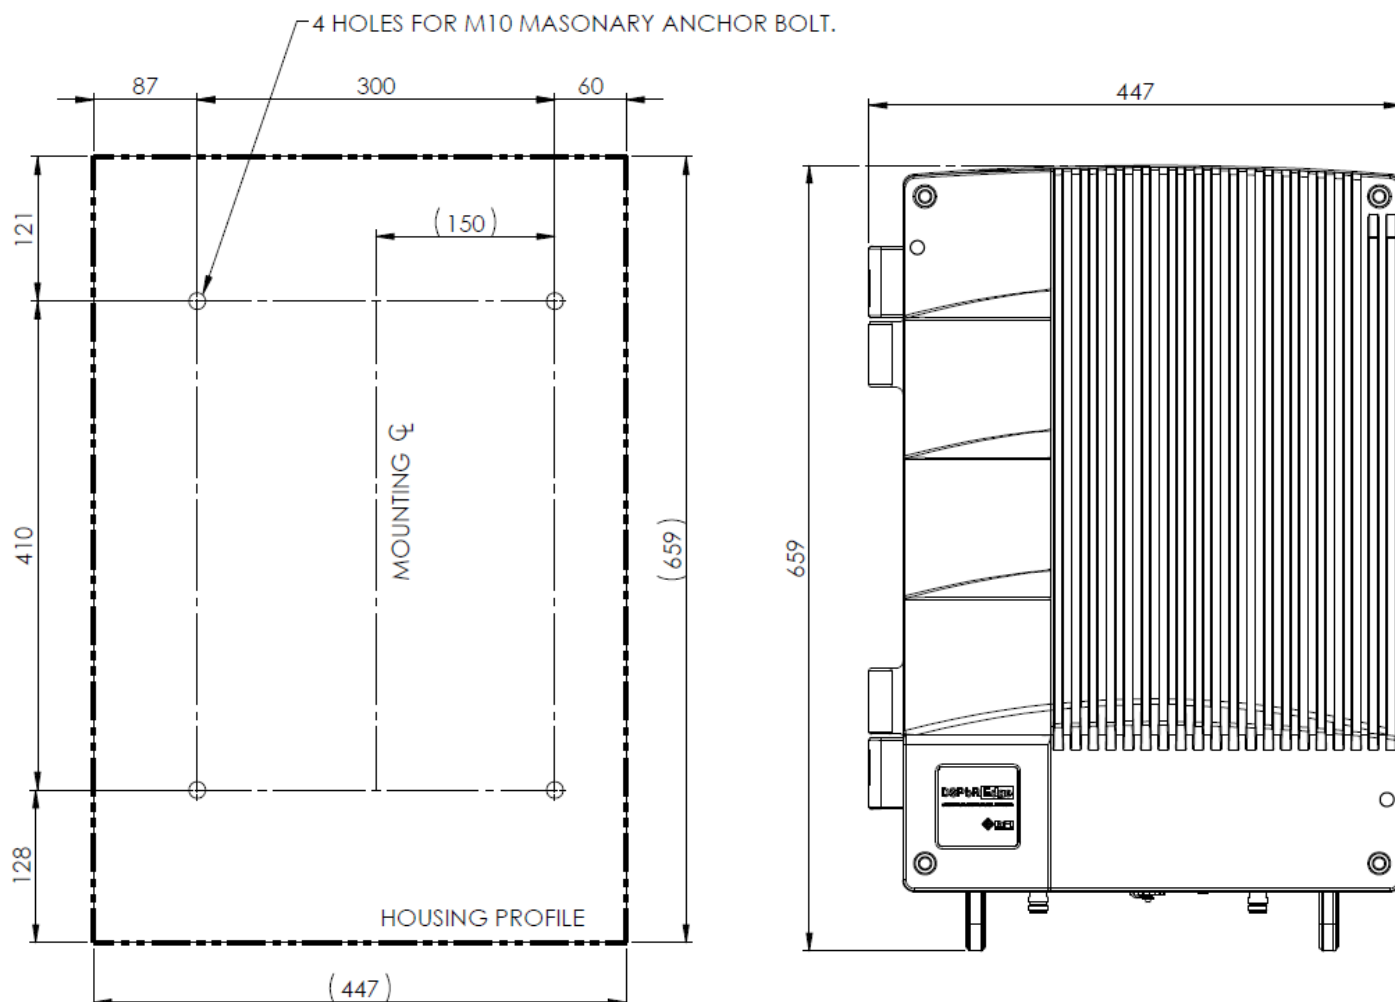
Wall mount fixing dimensions & centres and Edge Repeater front elevation view.
